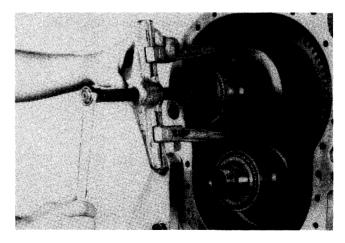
Remove 1st speed clutch double bearing cup, outer taper bearing and spacer.
